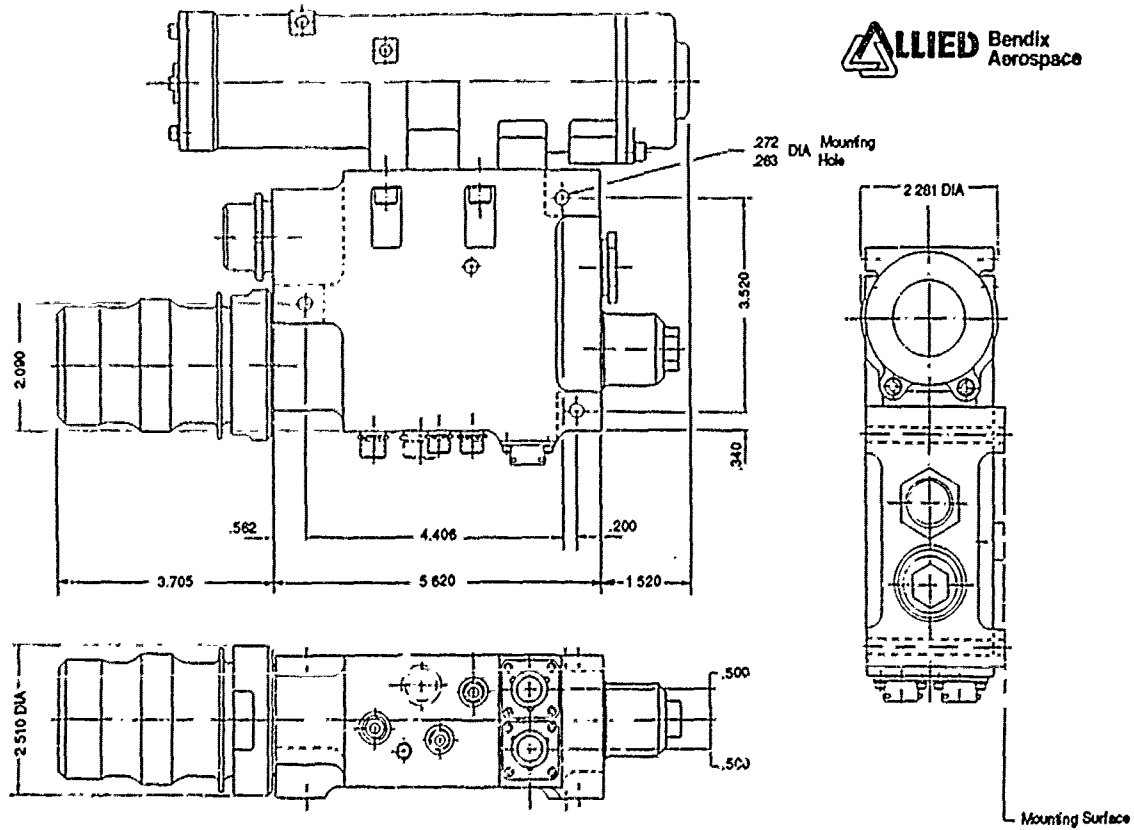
Bendix - Rotary Vane Actuator Control Valve Outline Drawing
